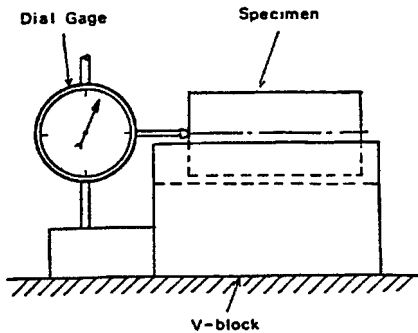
Assembly for Determining the Perpendicularity of End Surfaces to the Specimen Axis
